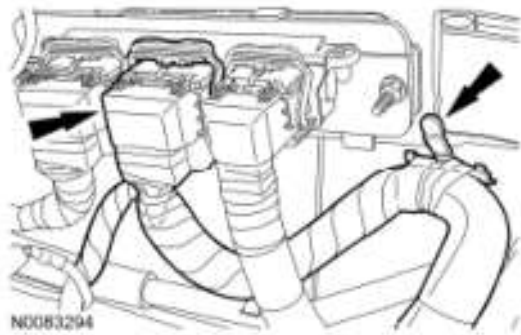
Locating Clamp And Power Steering Fluid Reservoir-To-Power Steering Pump Hose
